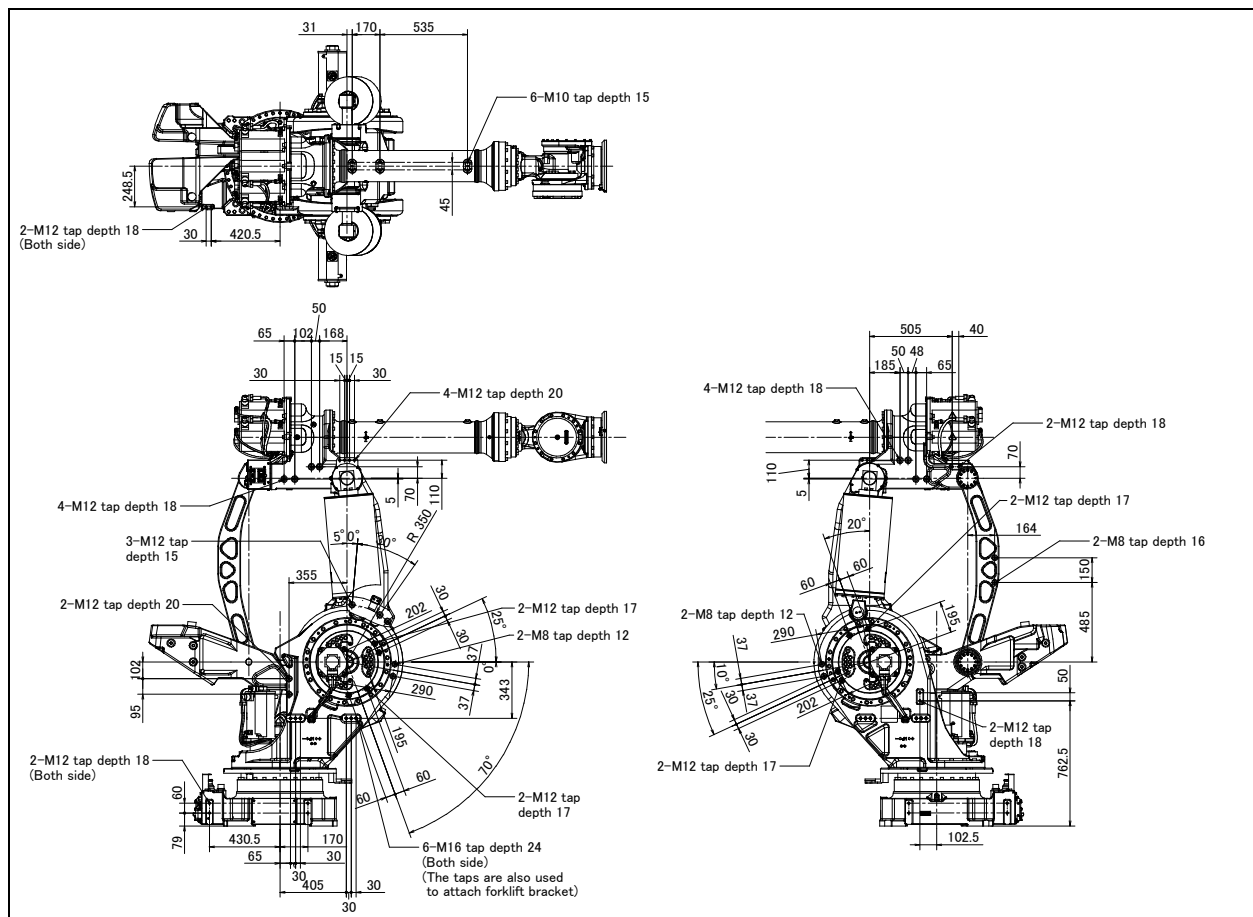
(a) Equipment mounting faces (M-900iA/600)
